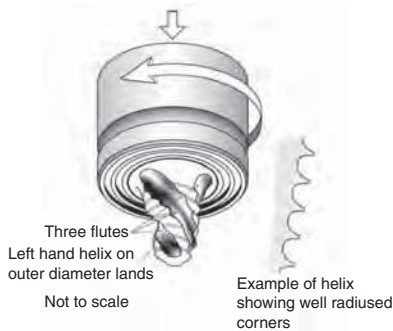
Typical friction stir welding tool with an MX-Triflute probe. Source: Ref 38
